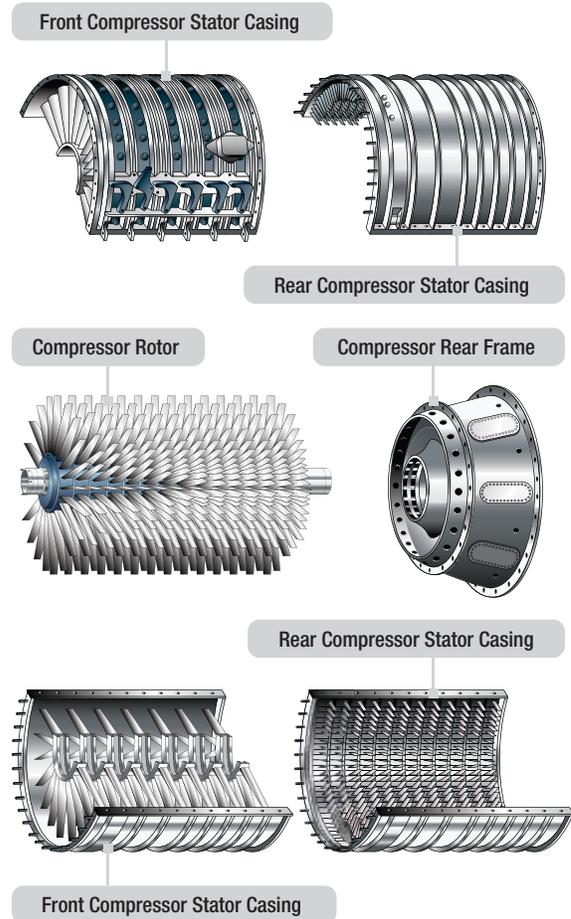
Rotor and stator elements of a typical axial-flow compressor.
